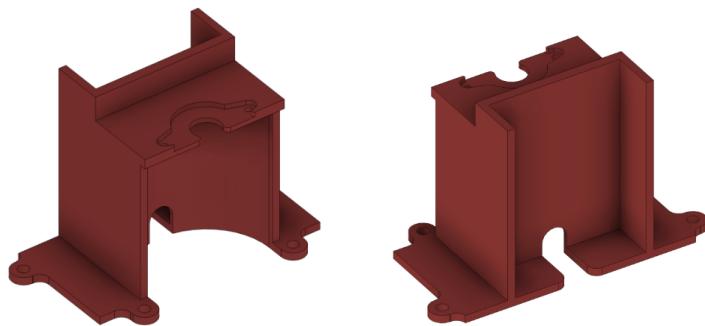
Motor enclosure and battery mounting superstructure (image upside relative to its installed position on BLiMS)
